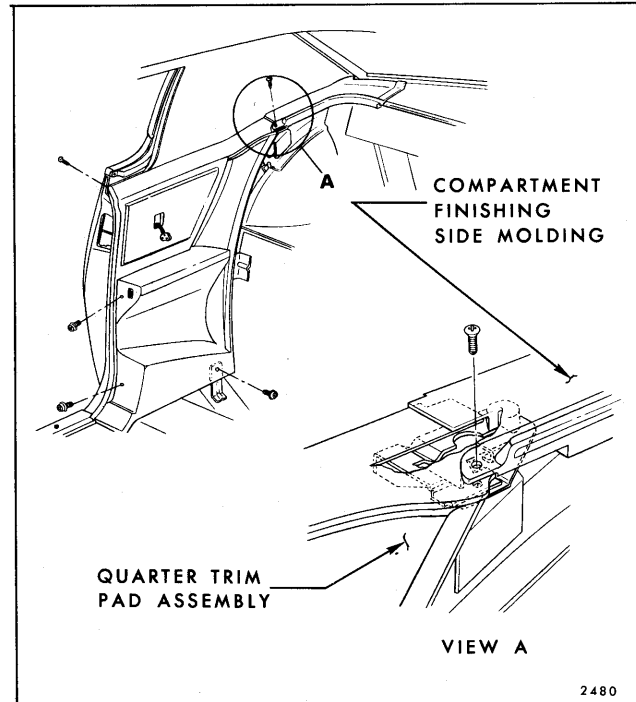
Rear Quarter Trim Assembly - Cadillac "E" Styles
